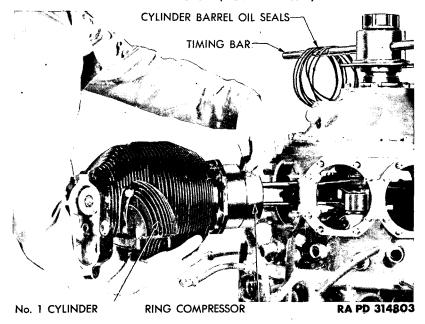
Installing No. 1 Cylinder Using Fixture 41-F-2997-84 and Compressor 41-C-2550-80
